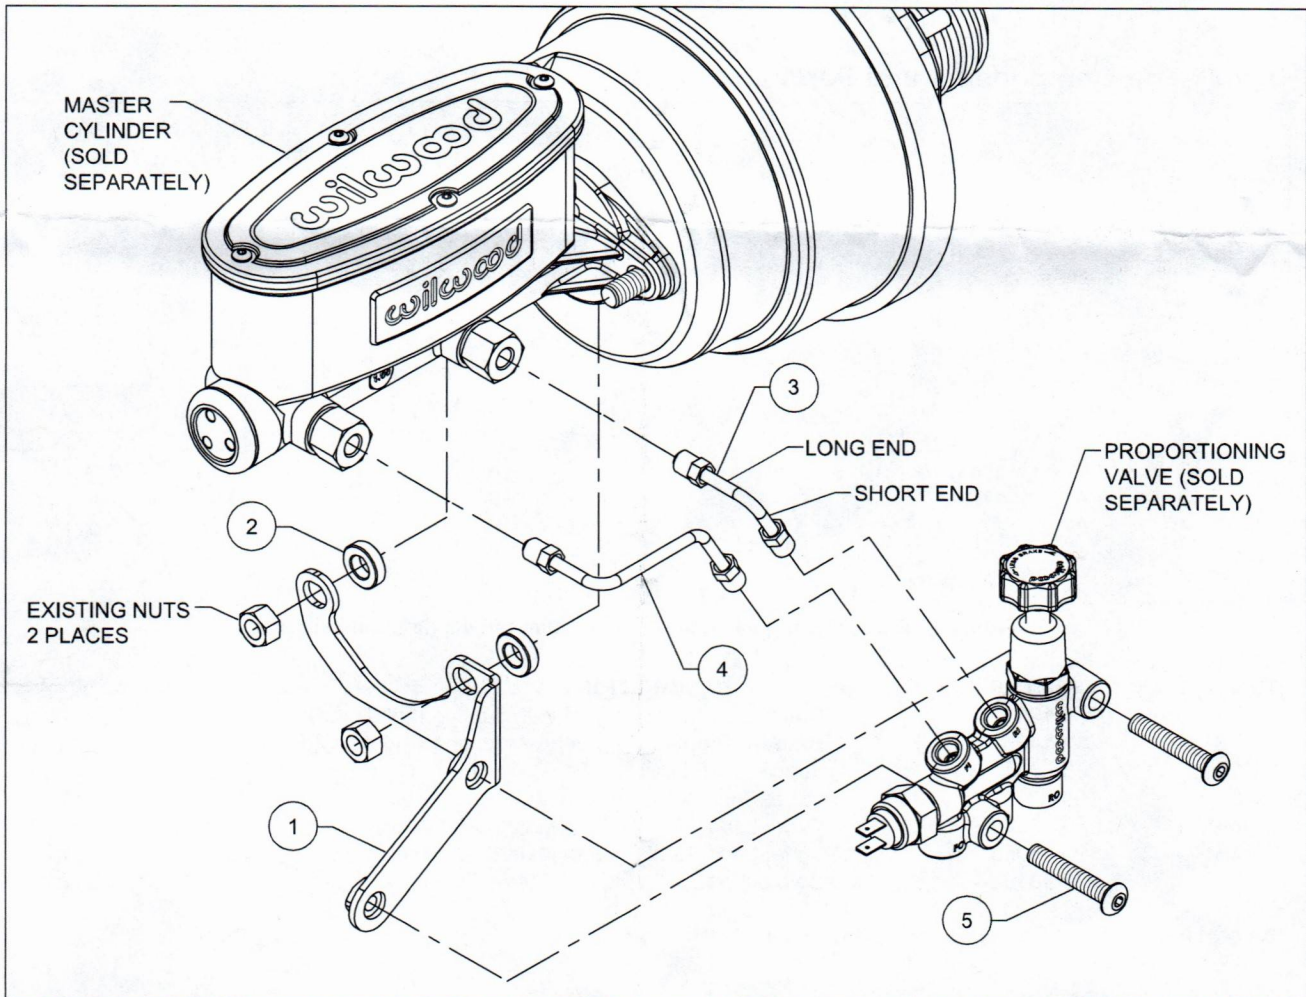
Proportioning Valve Bracket Kit Installation (left hand shown, right hand opposite)
